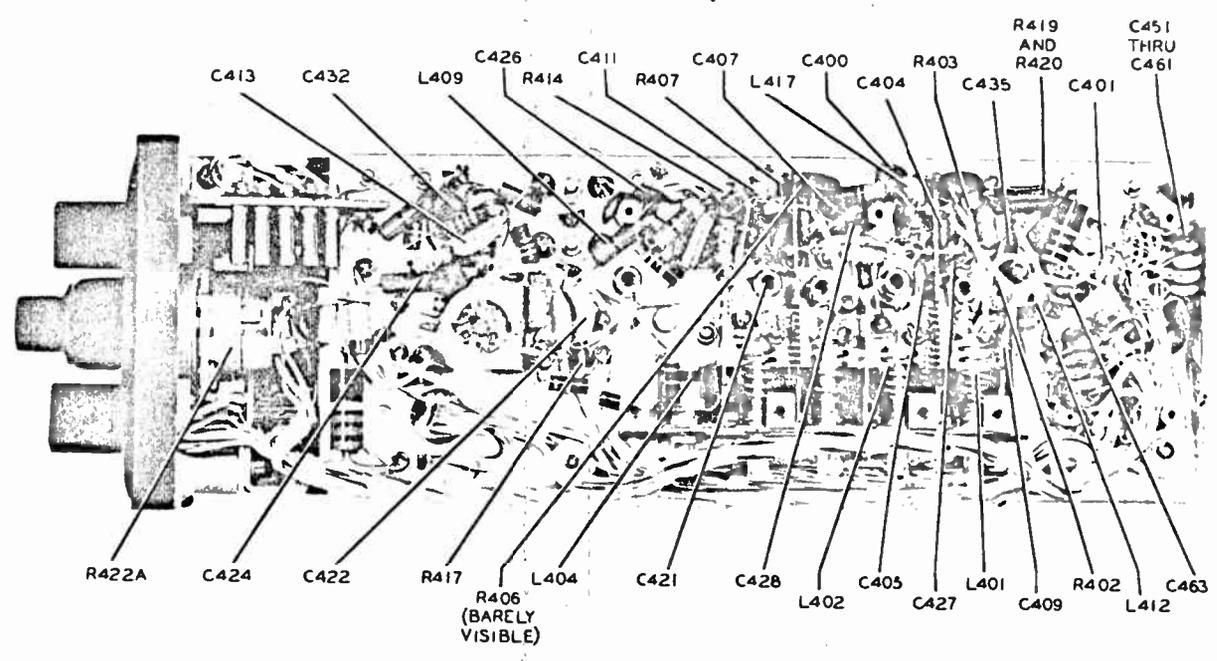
A. Receiver 51X-3, Bottom View, Dust Cover and R-F Shield Removed
